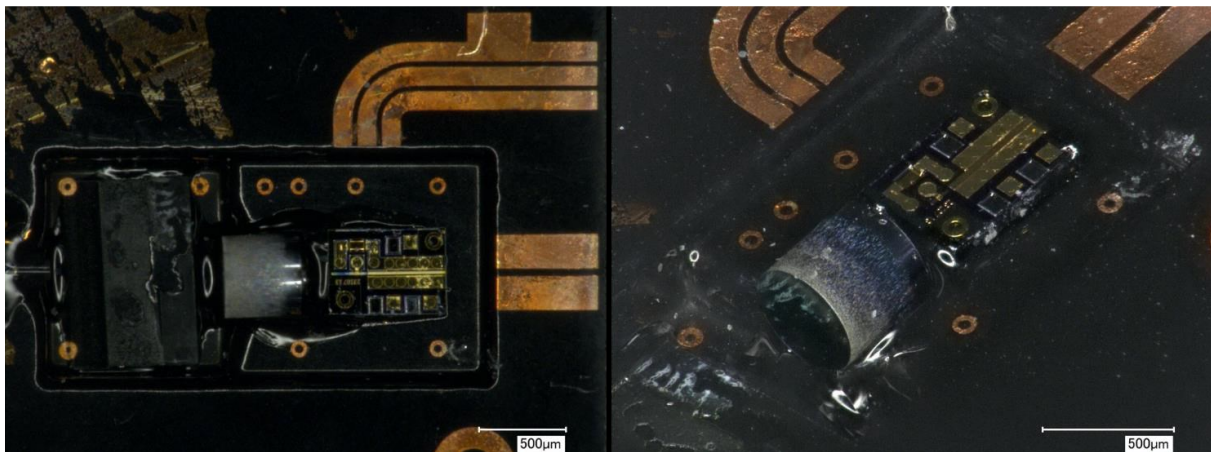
3D molded submount after preliminary component assembly; top view (left), isometric view (right)
